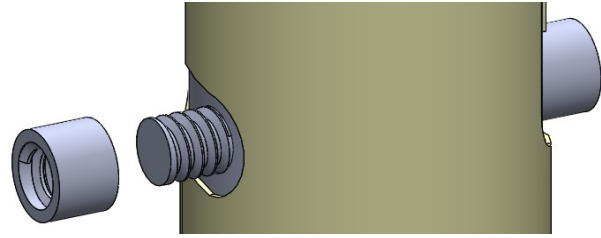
The thread pin which is placed through the holes in the inner shaft and through the cut-outs in the outer shaft. The cap with corresponding thread can be screwed on this thread.
